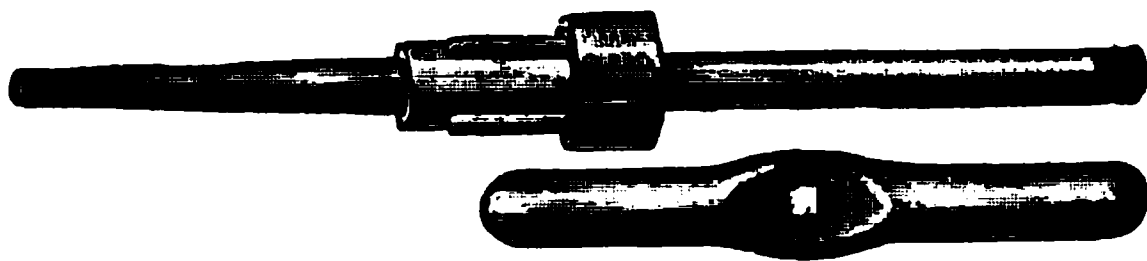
An Expander for the tubes of carriage boilers. By the use of this tool damage to the boiler may be readily repaired.
